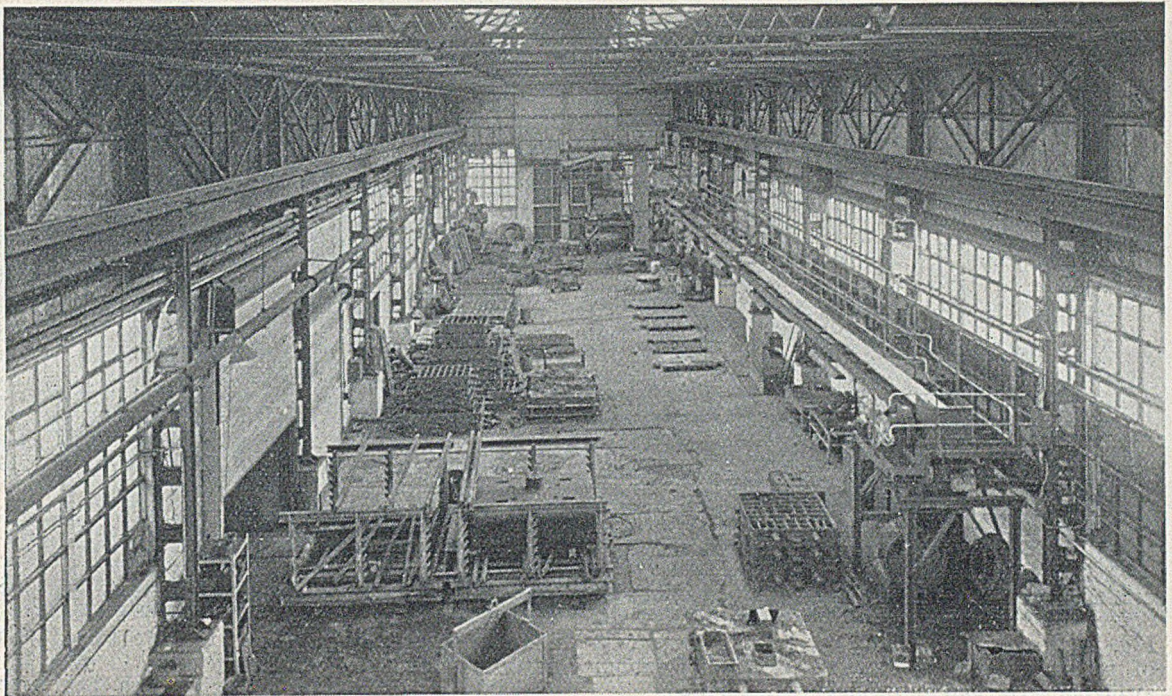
Separate Section of the Foundry where the Static Diaphragm Castings for Turbo-generators are made.
